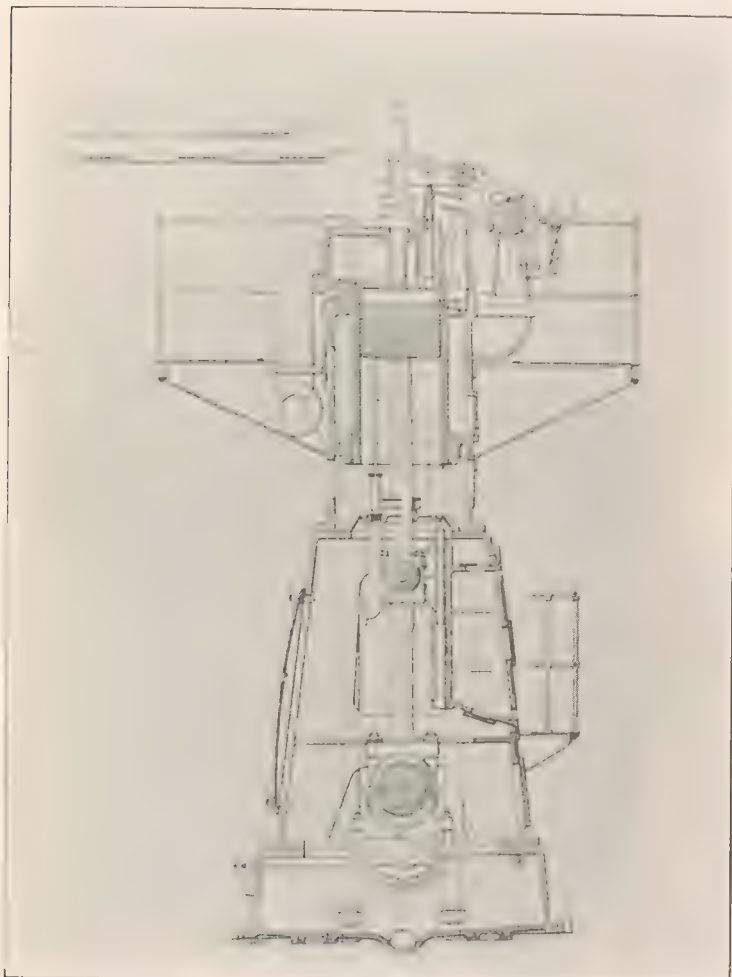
Werkspoor Diesel Engine for Land Service. Prototype of Marine Diesel Engine.
